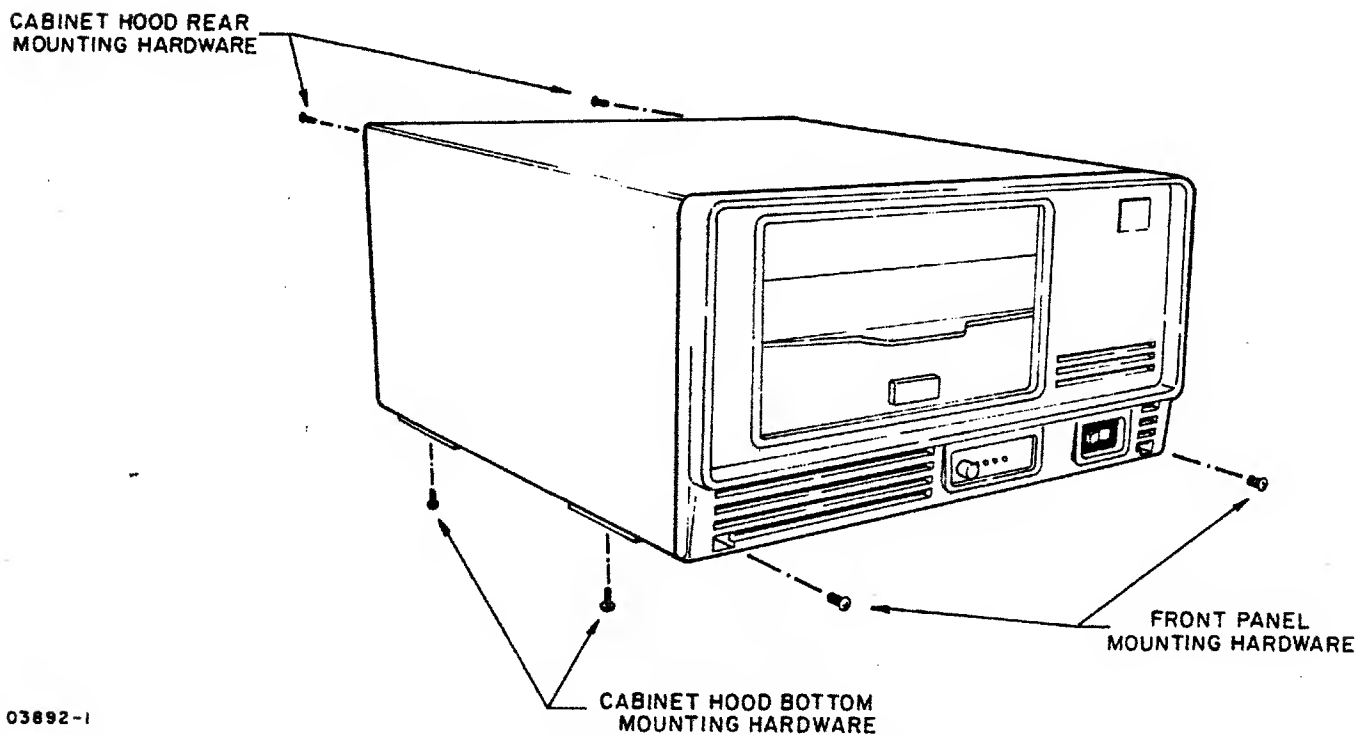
B-3. Front Panel and Cabinet Hood Mounting Details
